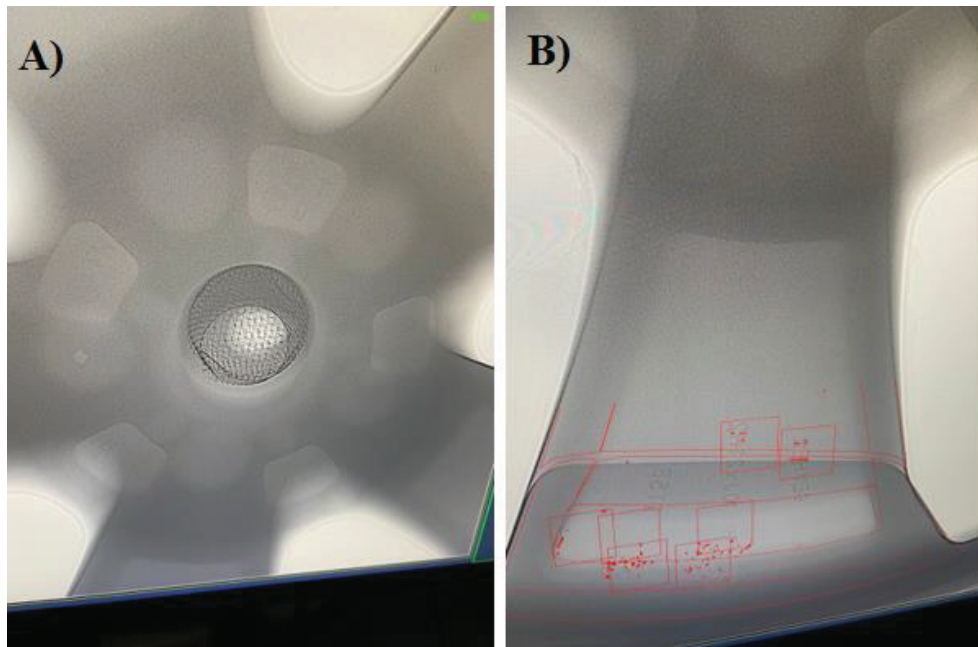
Xray inspection A) hub B) spoke part of wheel
